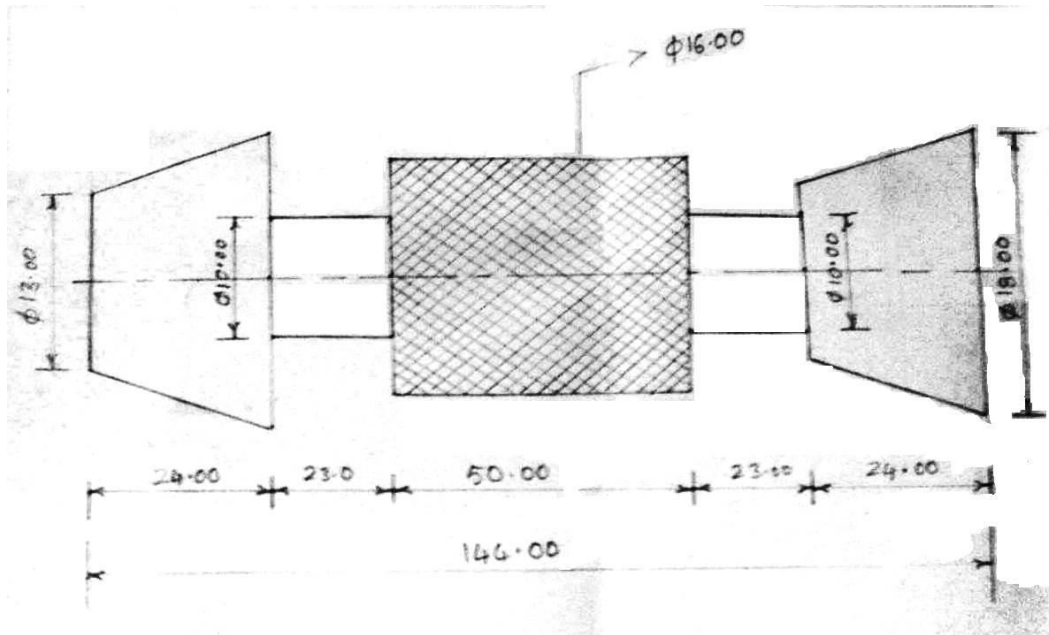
TAPER TURNING, STEP TURNING AND KNURLING.
